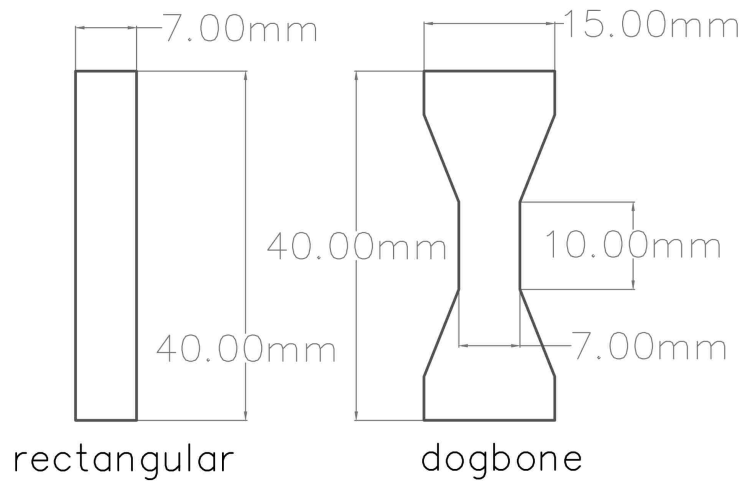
Dimensions and geometry of metal punches used for creating material tensile testing specimens, with (left) a rectangular shaped punch for testing modulus of elasticity and (right) a dogbone shaped punch for testing tensile strength.
